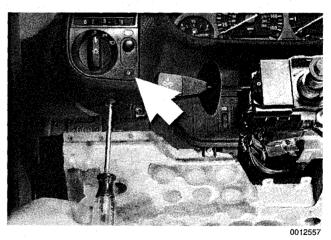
Remove retaining screw to pull out left dash insert (arrow).
